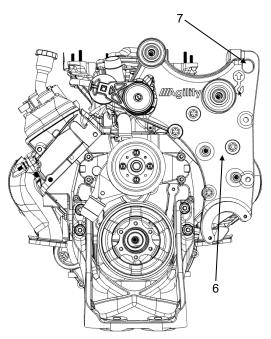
Engine Lift Point (7) on Main Accessory Drive Bracket (6)
